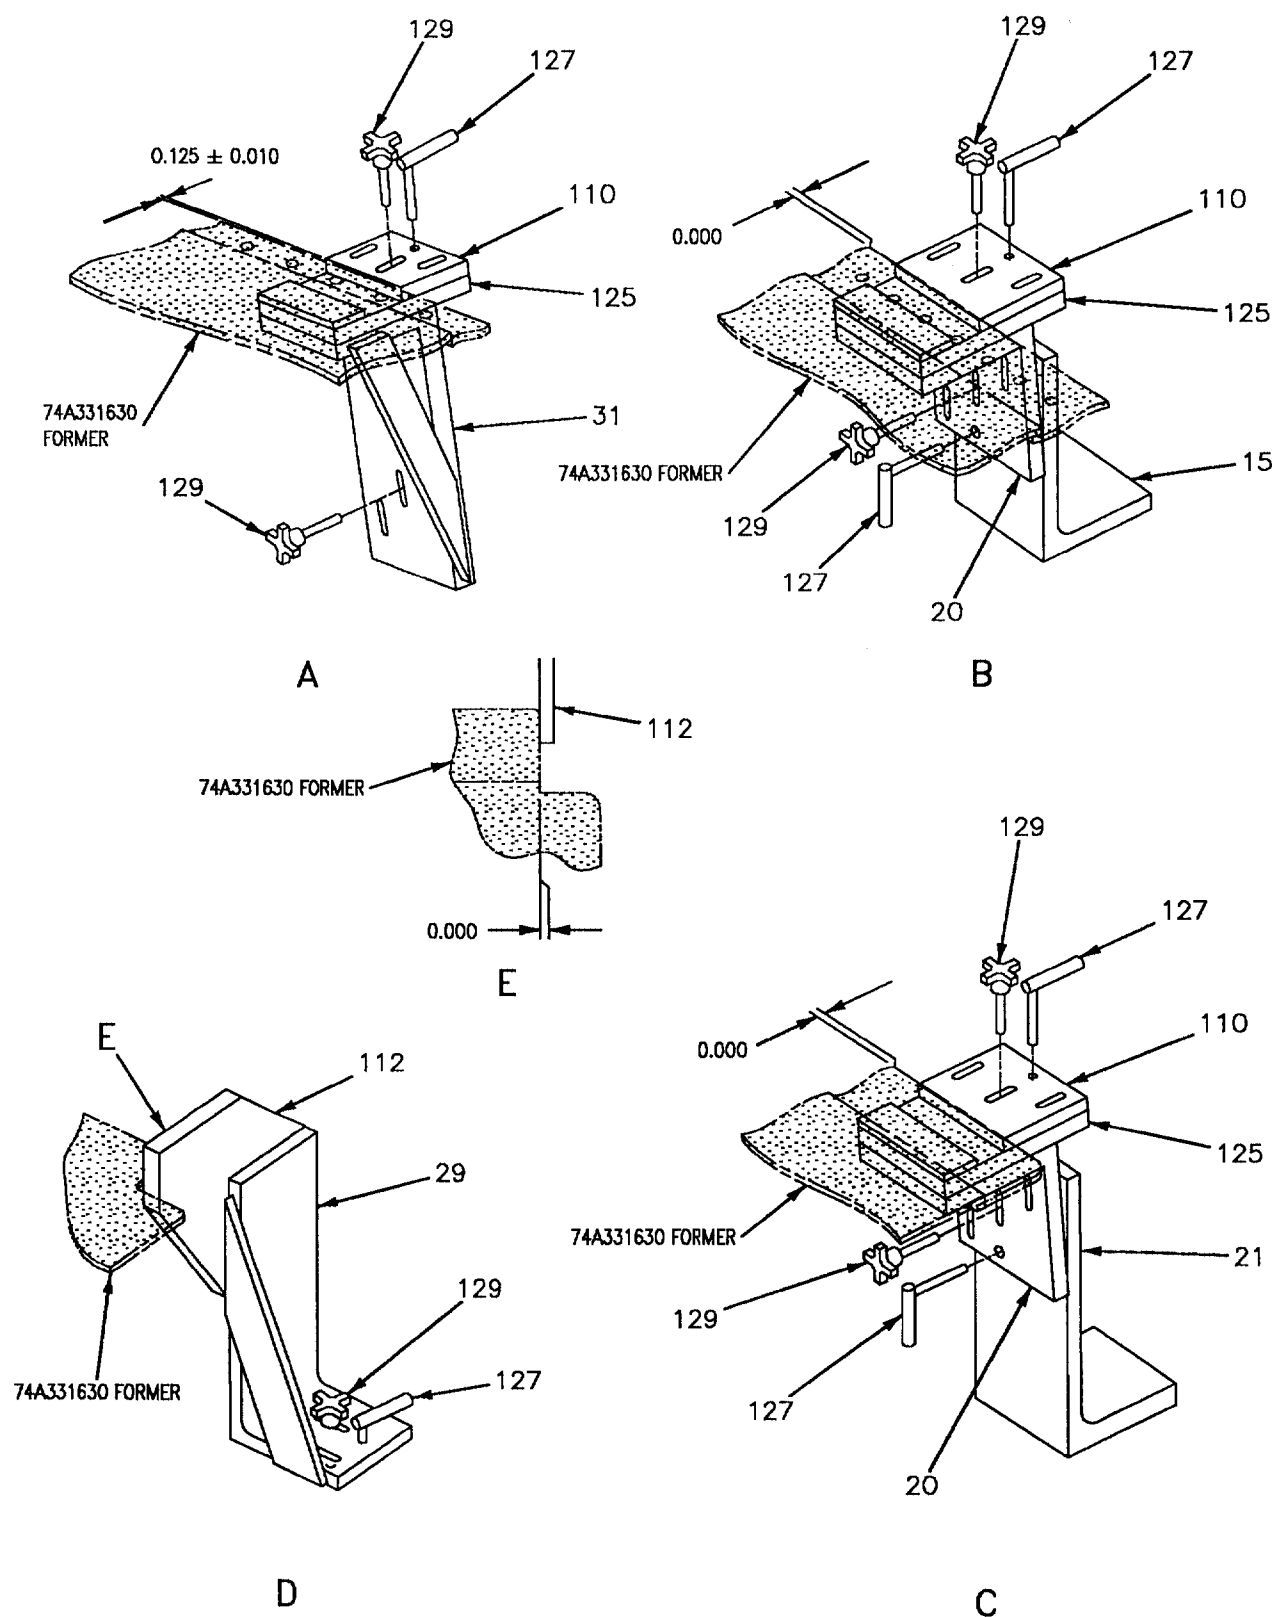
Maintenance Fixture RE174330621-1, -2 Details for Skin and Formers Replacement (Sheet 2)
